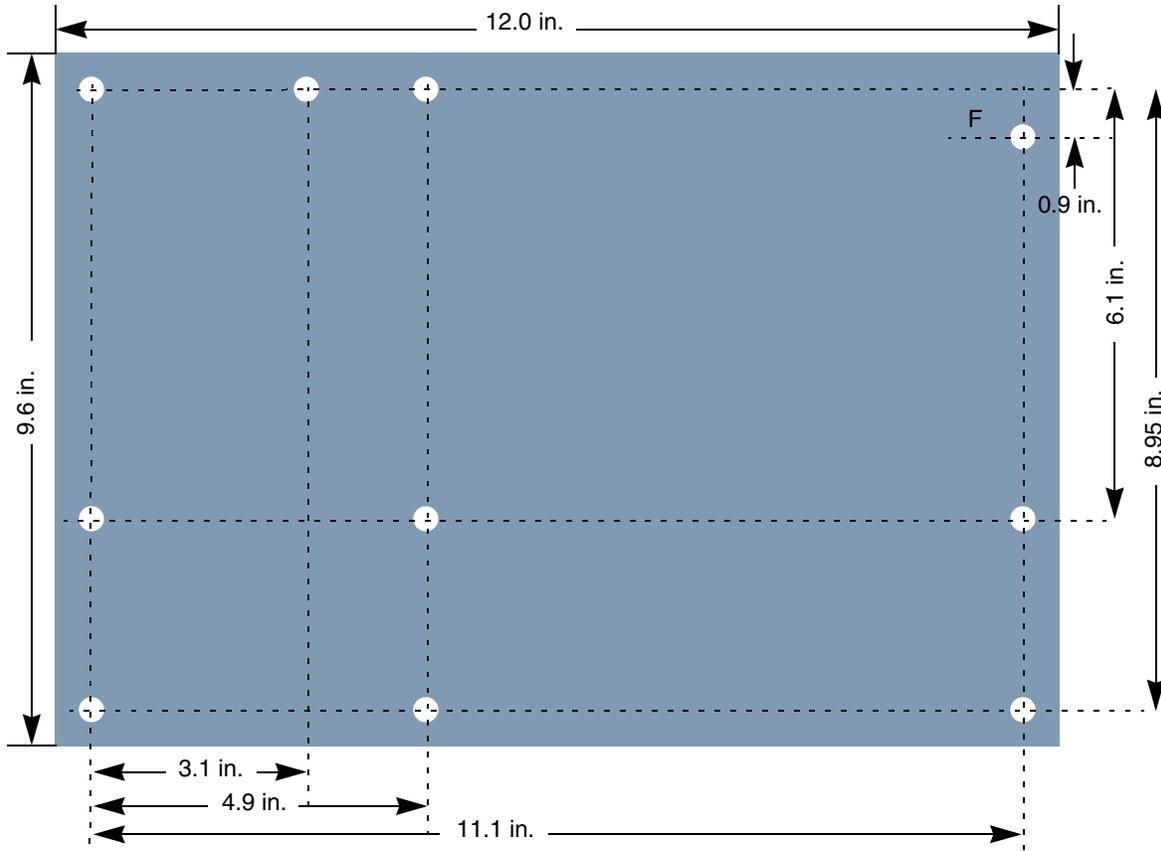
Arcadia ATX Chassis Mounting Holes
